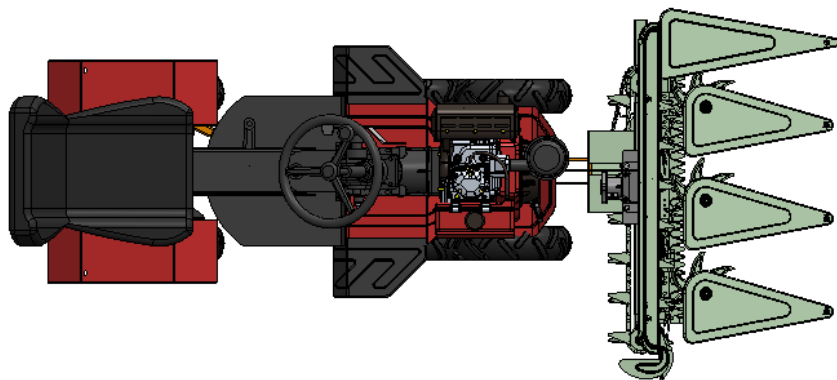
Layout diagram of highland barley harvesting and binding machine
